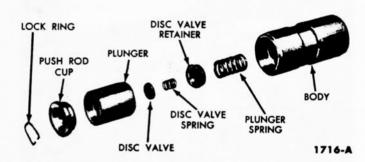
Hydraulic Valve Lifter Assembly— Typical
